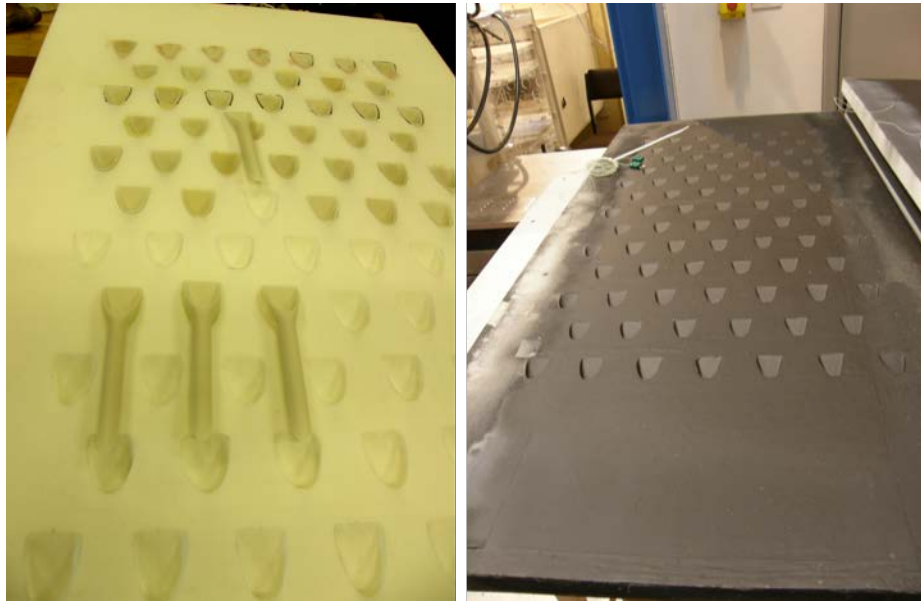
Photographs of the insert assembly and the finished foil bonded test plate
